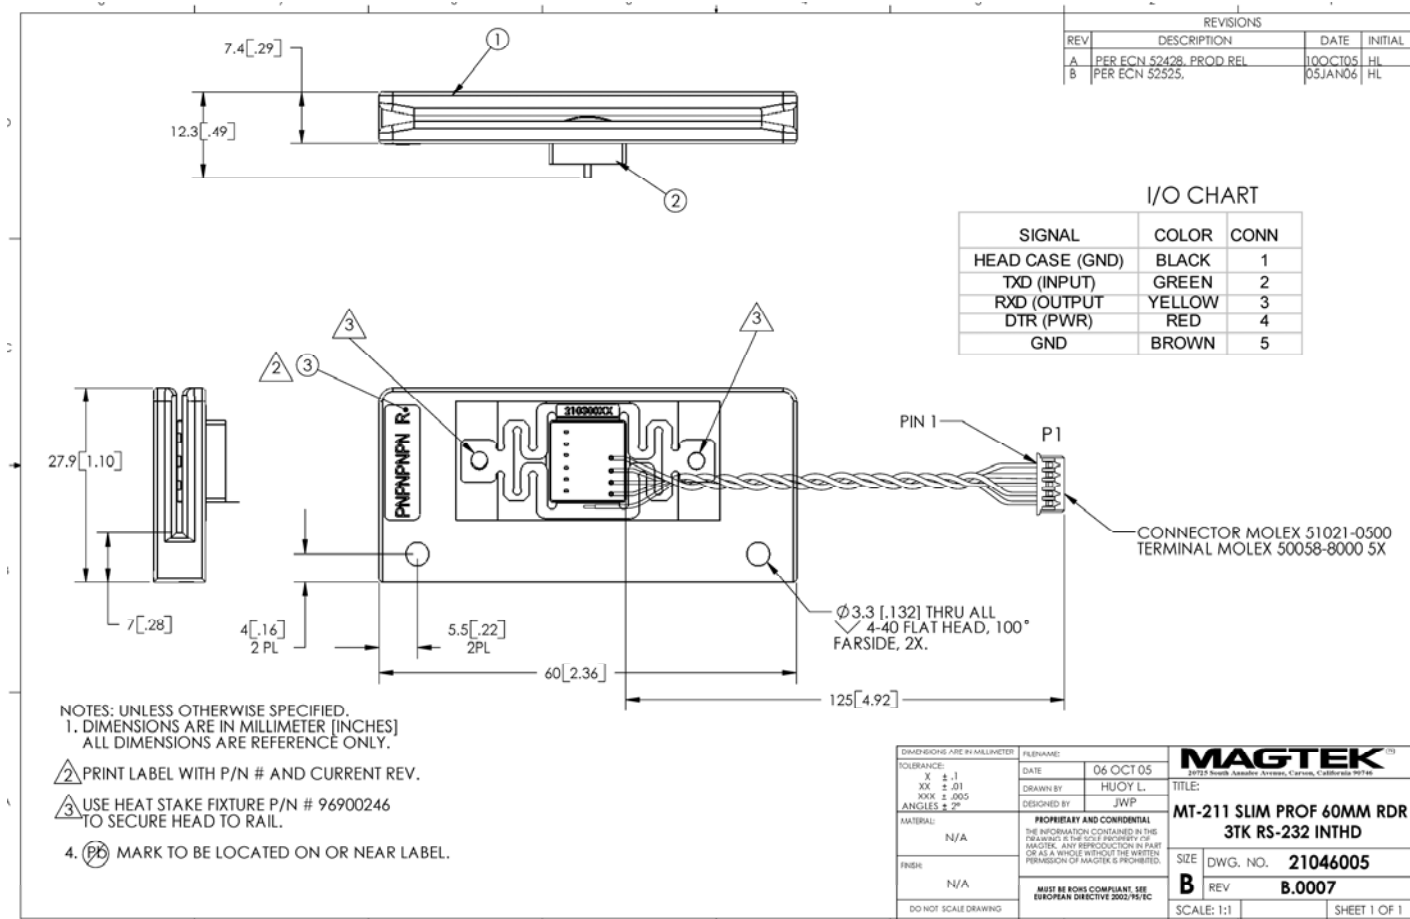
RS-232 IntelliHead 60mm, 3 Tracks, Cable 125mm, 5-Pin Molex
